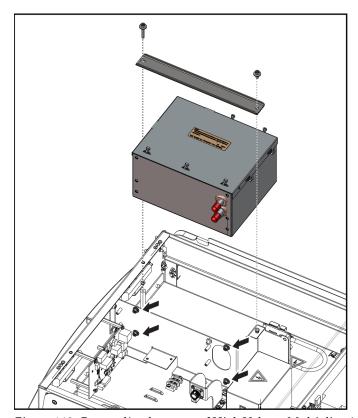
Removal/replacement of High Voltage Multiplier Assembly
